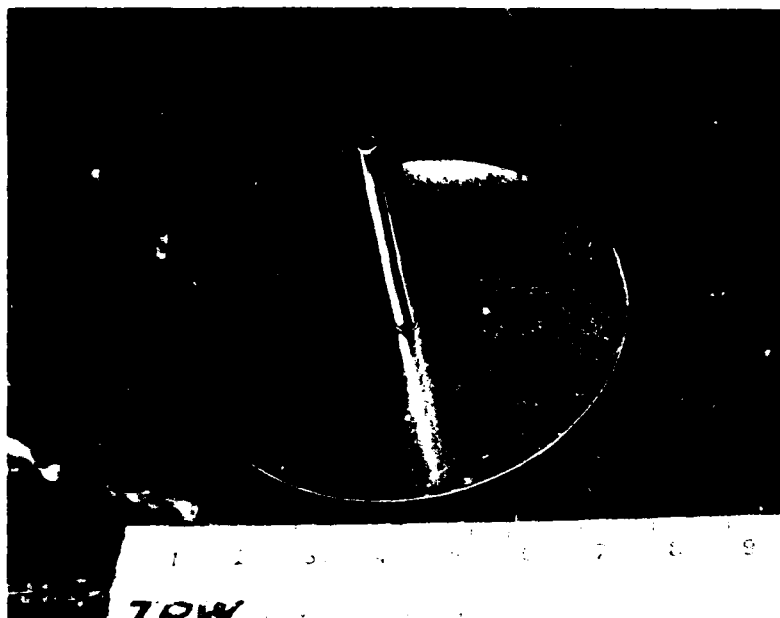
Cell Cover-Vent/Fill Tube Assembly
